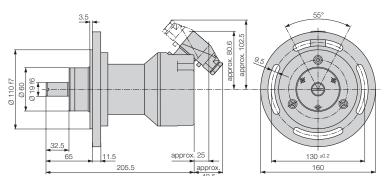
KINAX WT 707 with additional gear, plug connector and flange.
